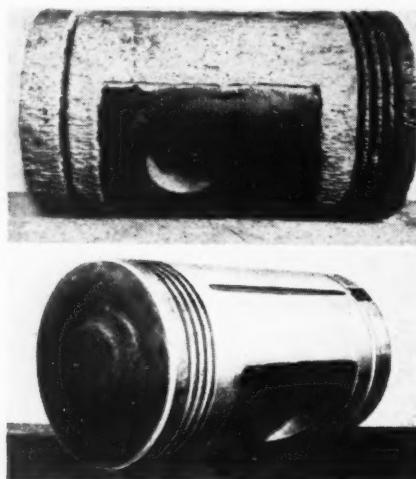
Top, worn diesel-engine piston after rebuilding; bottom, same piston after machining.
